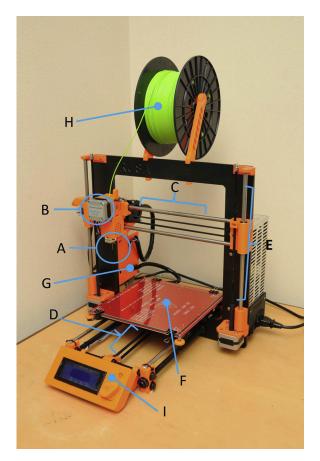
Anatomy of a 3-dimensional printer, Prusa3D i3 (Prusa Research, Prauge, Czech Republic) pictured. A Heating element and nozzle; B extrusion motor mechanism; C *X*-axis; D *Y*-axis; E *Z*-axis; F print bed; G motherboard; H filament spool; I control panel.
